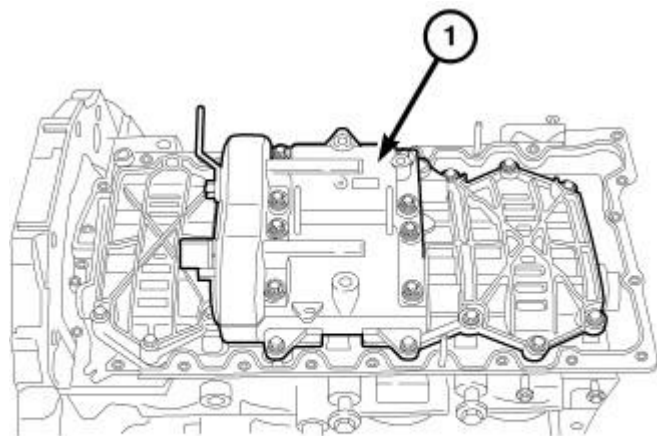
BALANCE SHAFT TIMING TOOL
